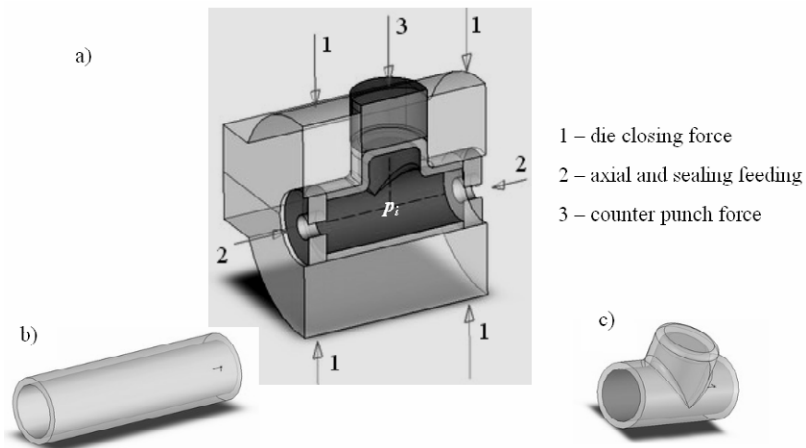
The hydroforming principles: a – tool setup, b – initial tube, c – final product (T-joint)
